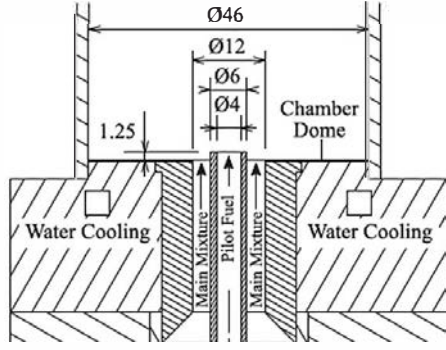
Detailed view of the injection system with the main dimensions are in millimeters.
